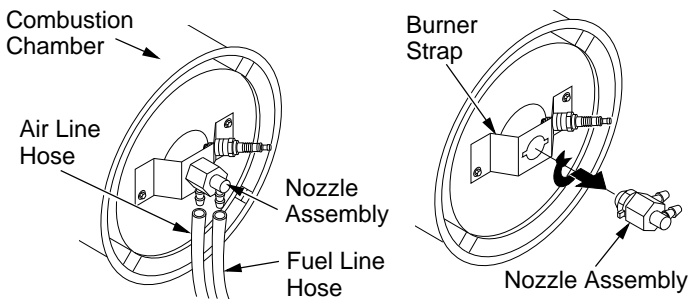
Removing Air and Fuel Line Hoses, 35,000 Btu/Hr Model
